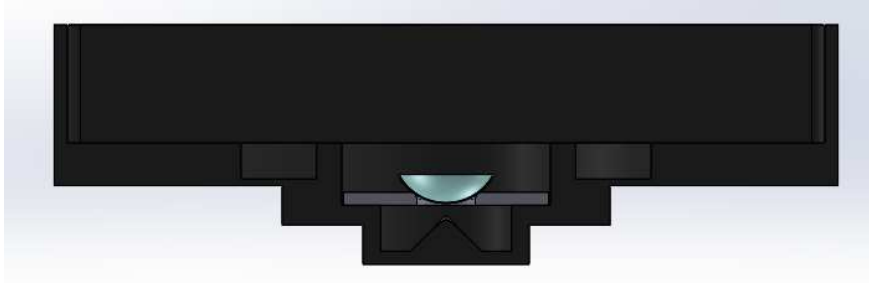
Cross Section View of the Tank with the Contact Lens Mount
